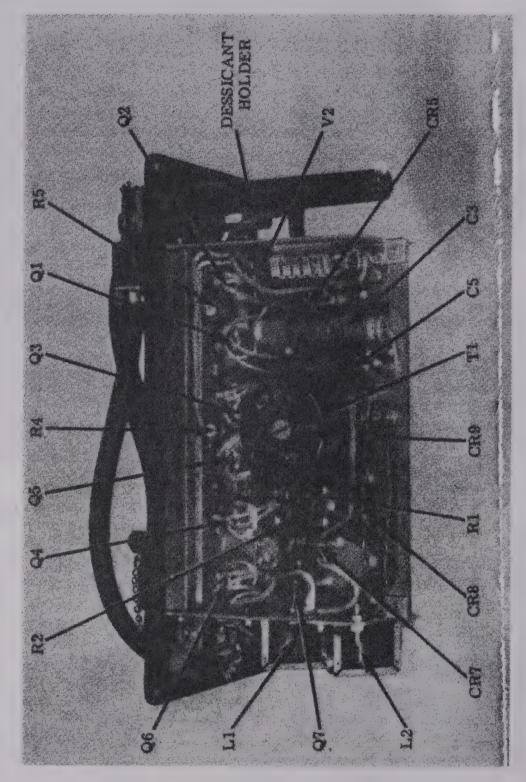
KA-3 Keyer Adapter electronics chassis, top view.
